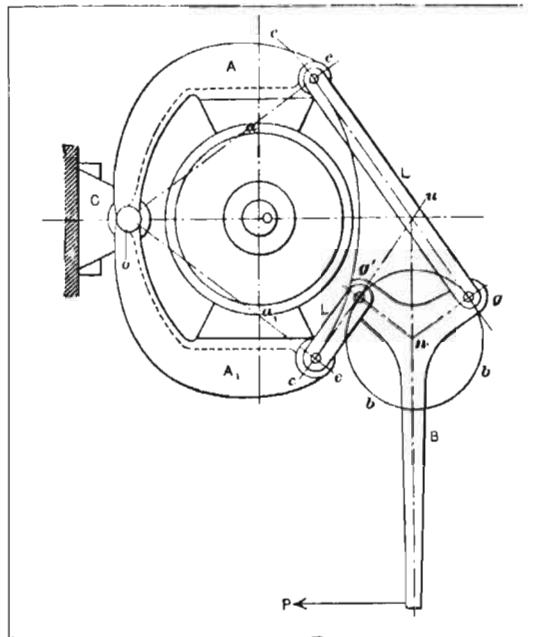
Arrangement of Links and Levers for Operating the Clam-shell Type of Block Brake
